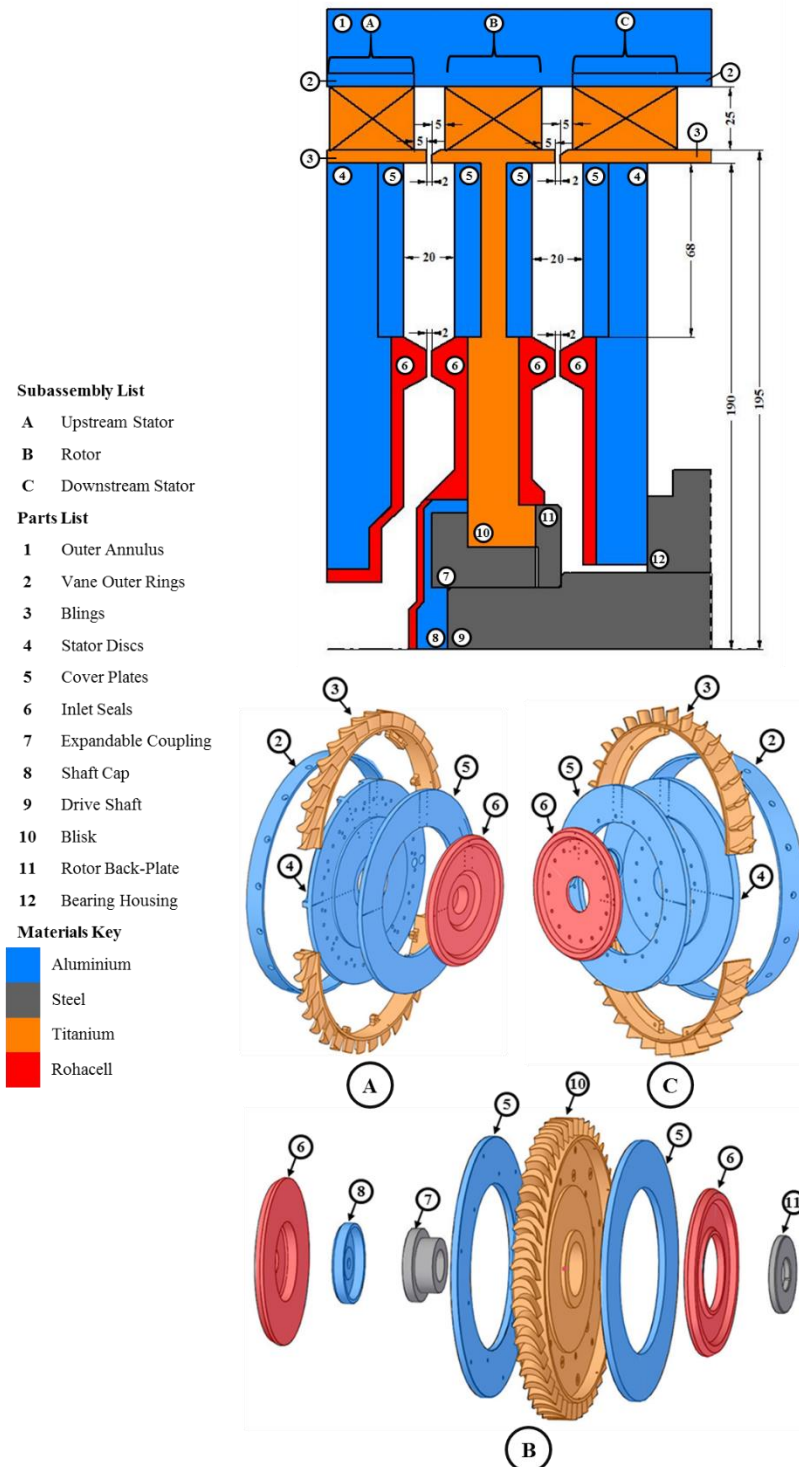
Colour-coded cross-section of turbine assembly based on material selection with exploded view of the upstream and downstream stator (A and C) and rotor (B) subassemblies.
